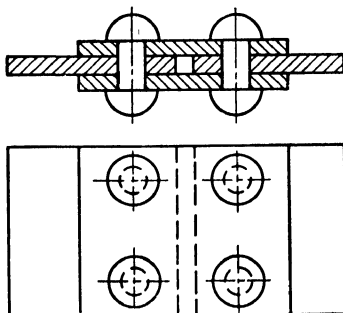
Double-plate butt joint, $\frac{1}{64}$ -in. steel rivets, driven hot.
